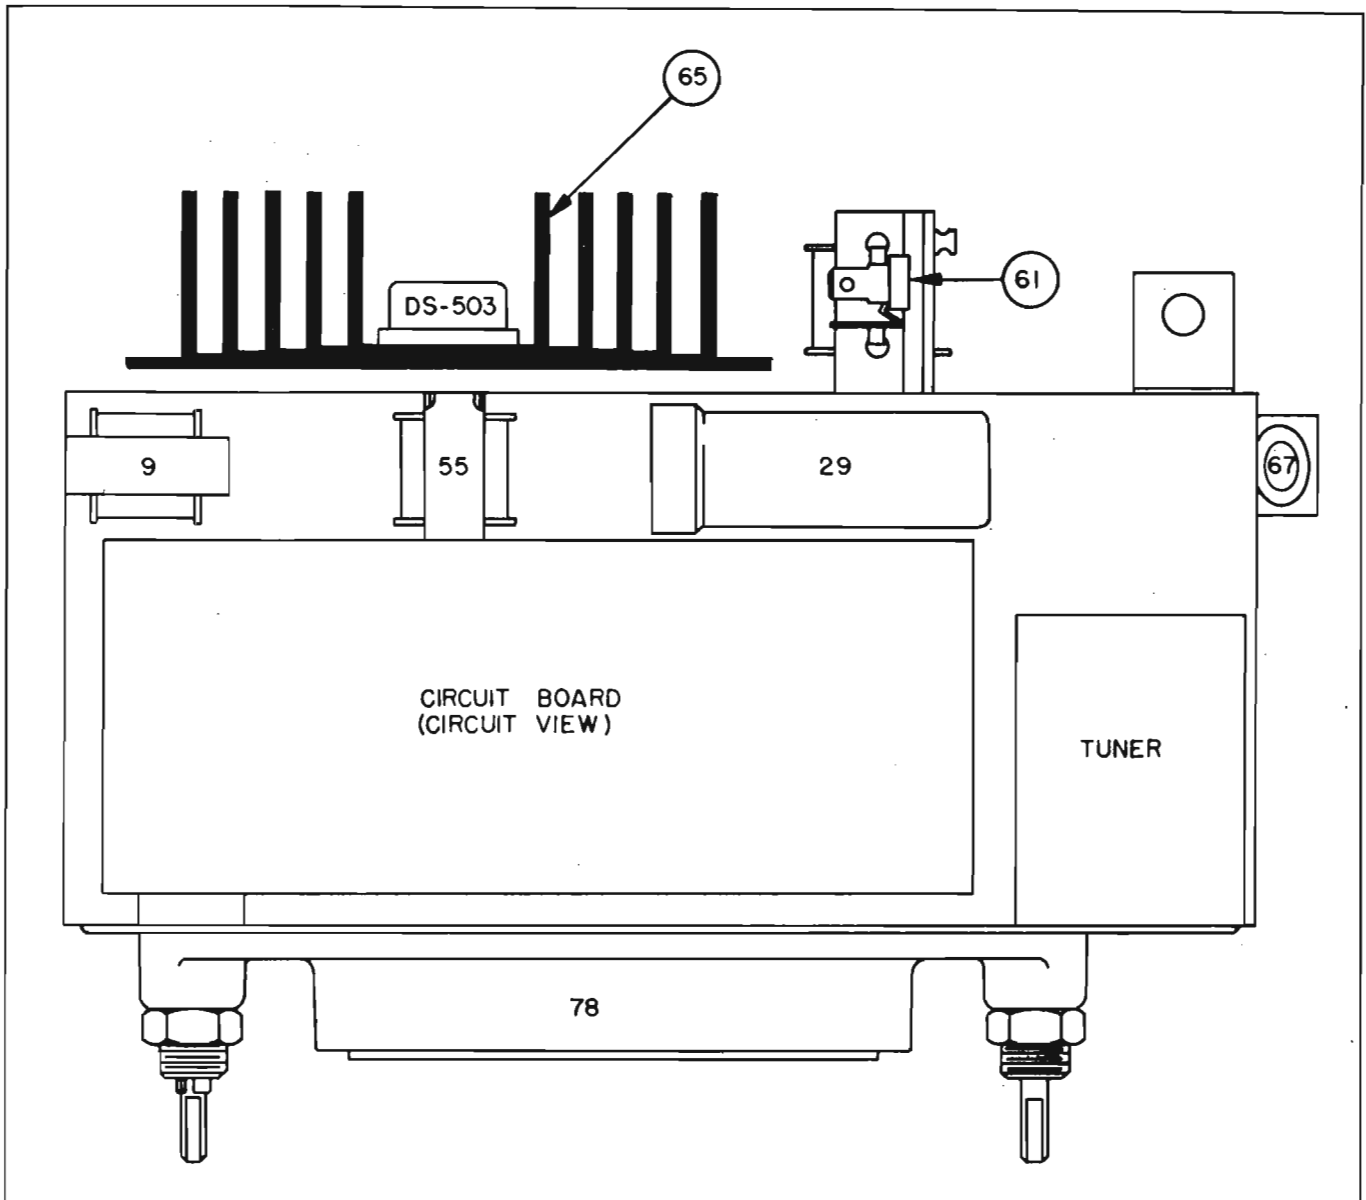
PARTS LAYOUT - TOP VIEW - 988336 - RADIO
